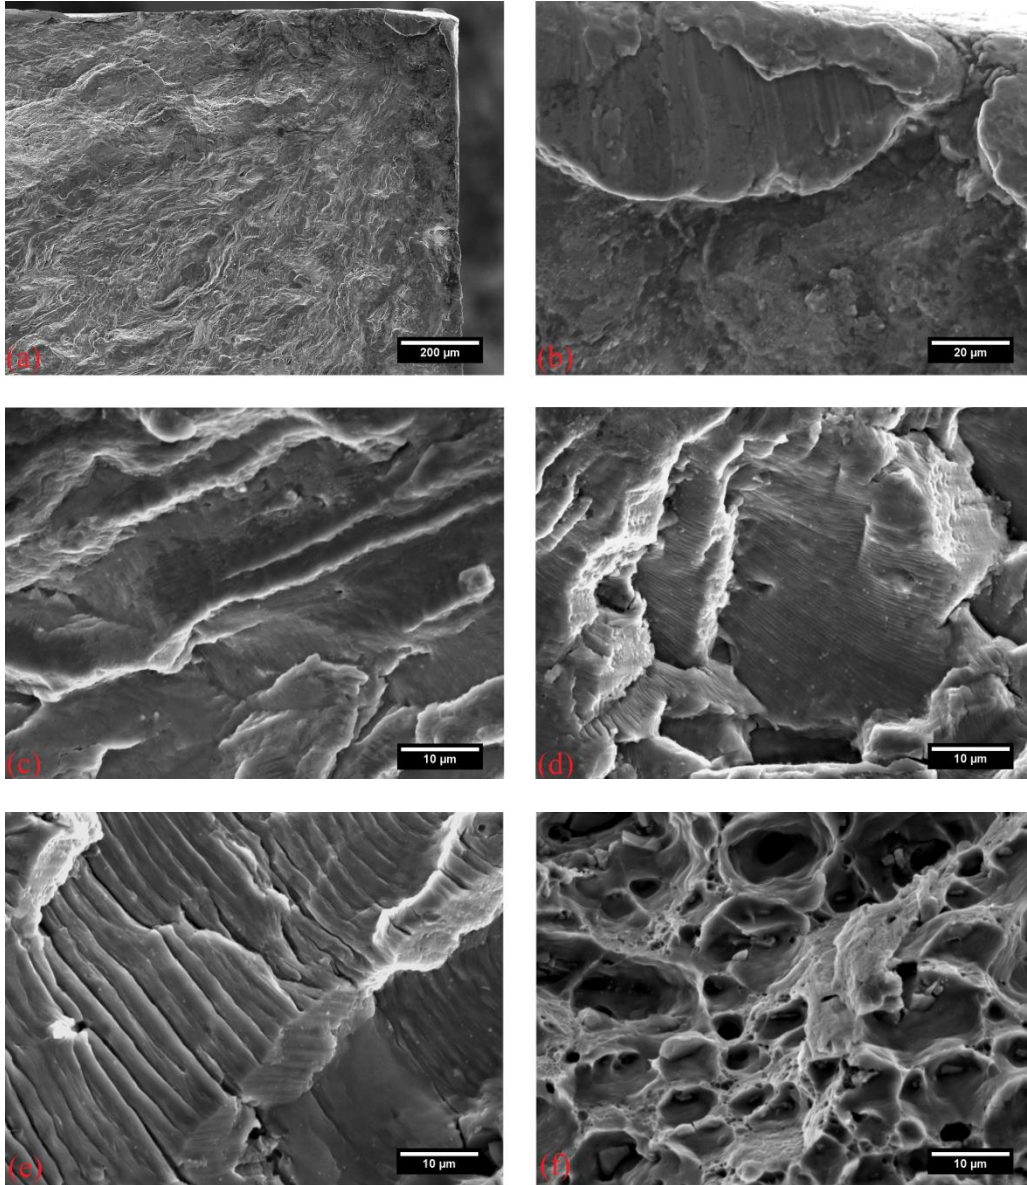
(a) Overview and (b,c,d,e,f) details of fracture surface of a fatigue sample tested in air with increasing crack length
